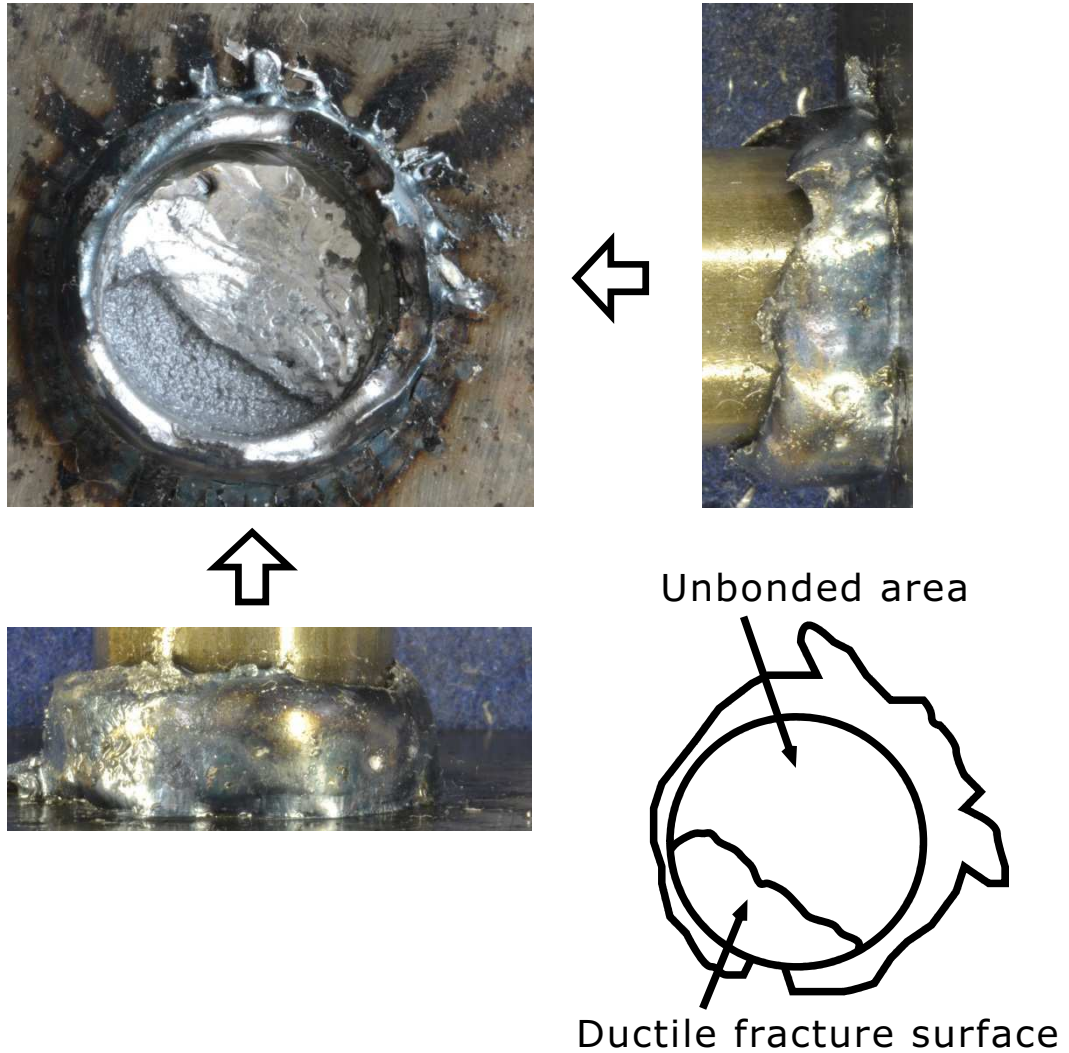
Trace of weld defects observed after tensile strength test with welding condition of 1.5kA and 2.0s
